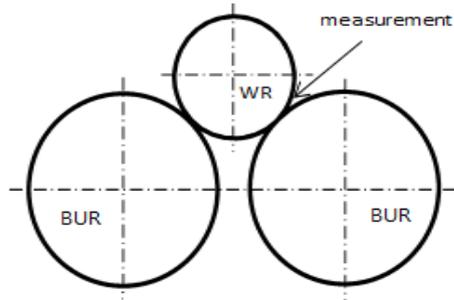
Roll zero point adjustment Measurements using thickness gauges
